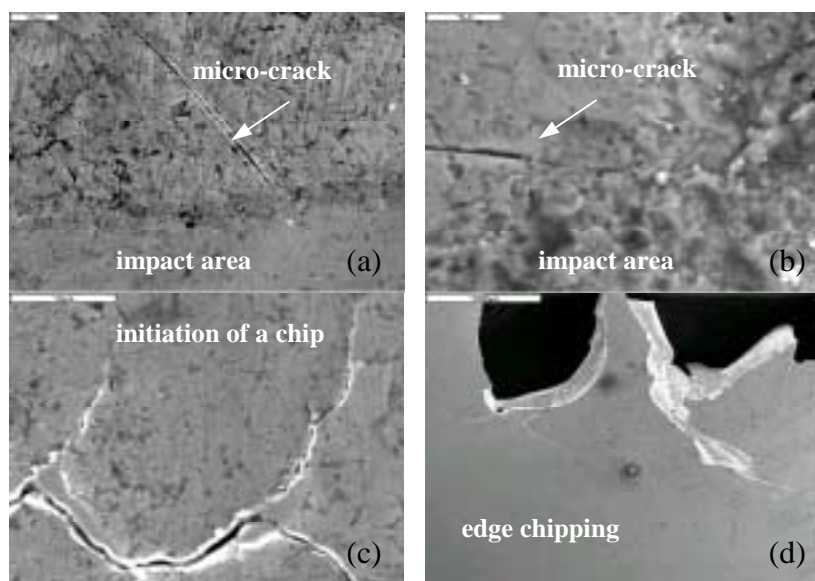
Damage and failures of strip specimens, (a) and (b). Initiation of micro-crack, (c), Crack propagation, (d). Final failure.
